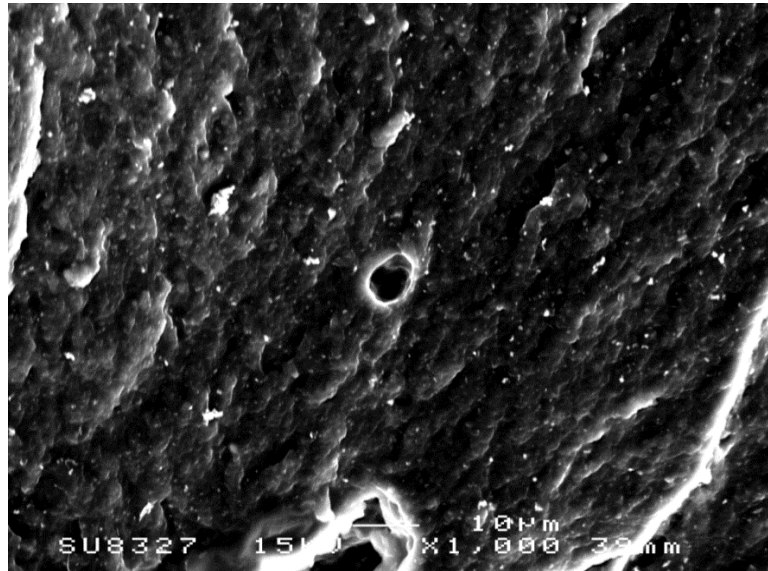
A fracture surface of a spring seal displaying tear lines and a void present on the fracture surface.
